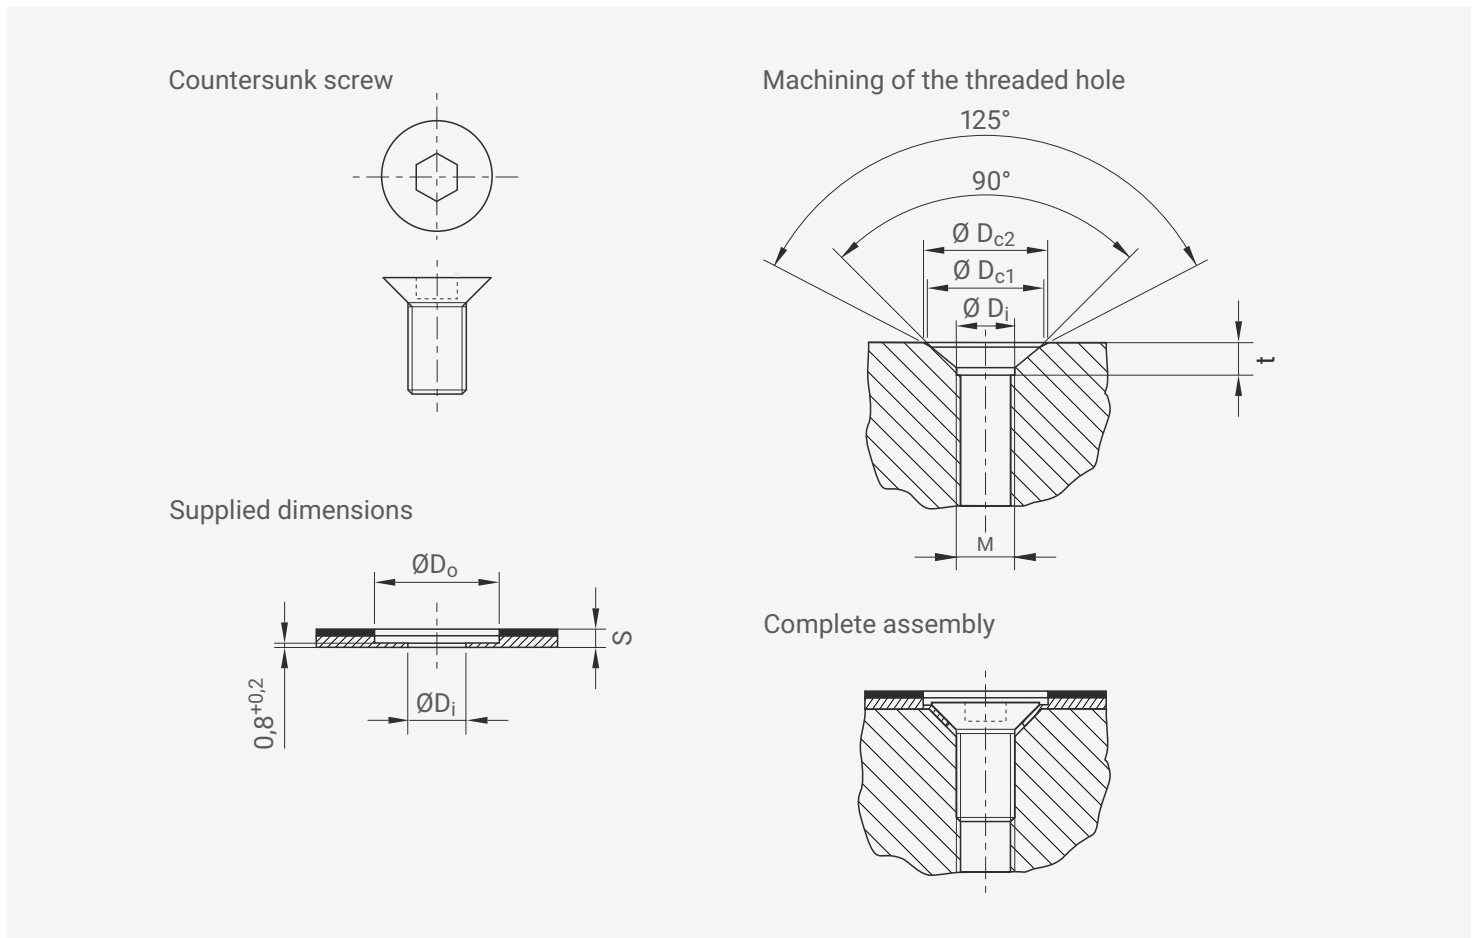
Fixation of GGB-CBM sliding plates using countersunk screws
